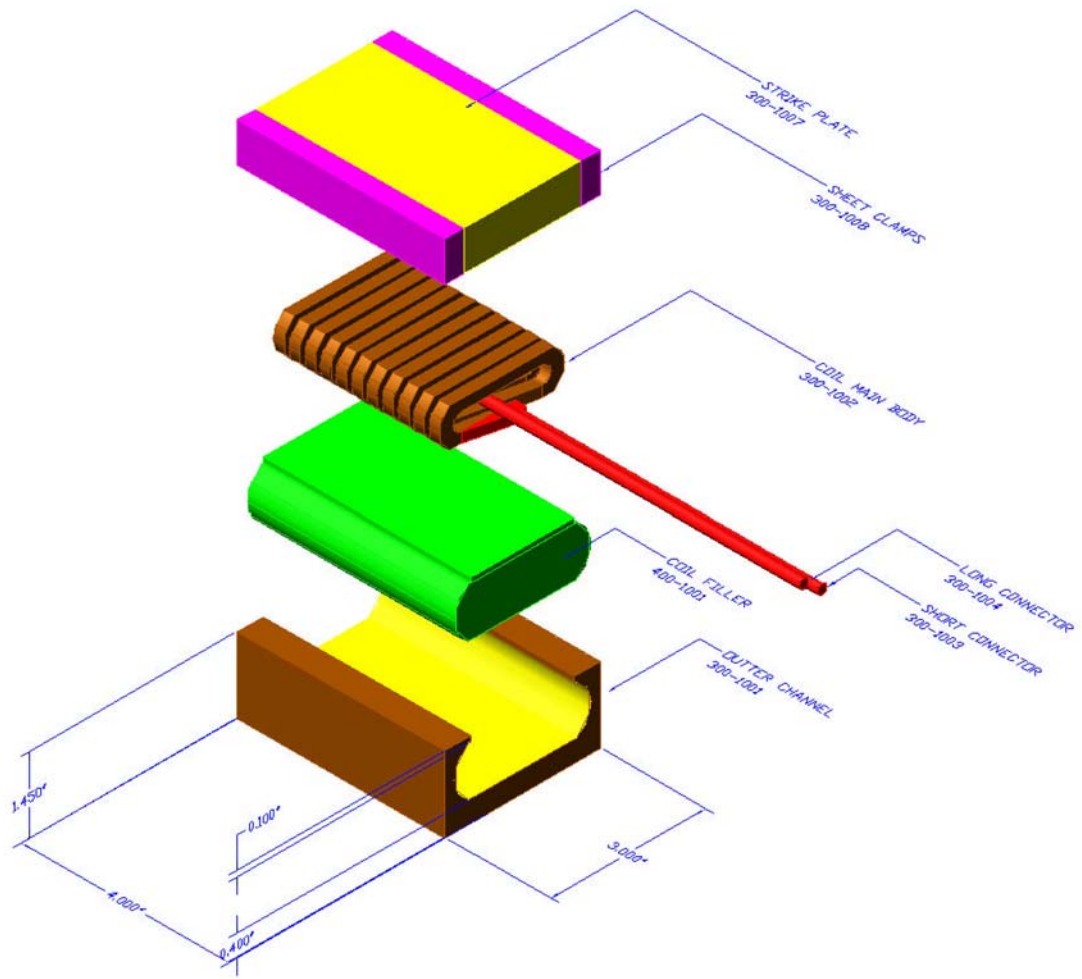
CAD image of the machined coil setup in the outer channel with the die (dimensions in inches).
